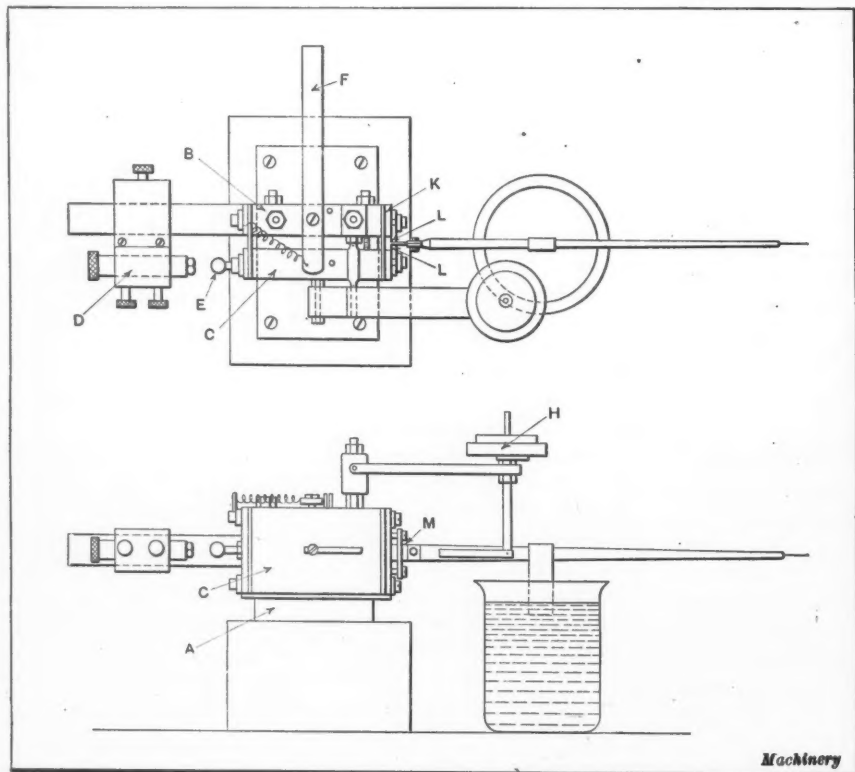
Arrangement of the Magnifying Mechanism employed on a Minimeter used for inspecting Precision Gage-blocks
